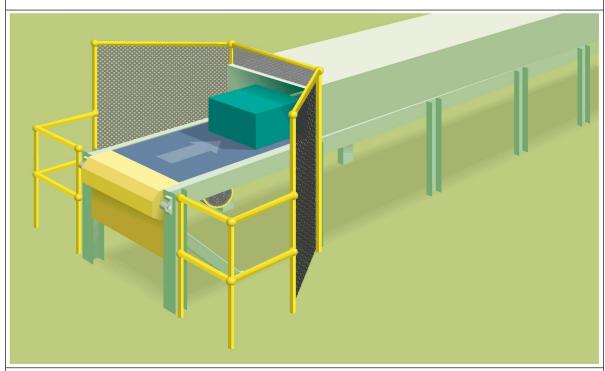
TYPICAL PROTECTIVE MEASURES AGAINST HAZARDS
